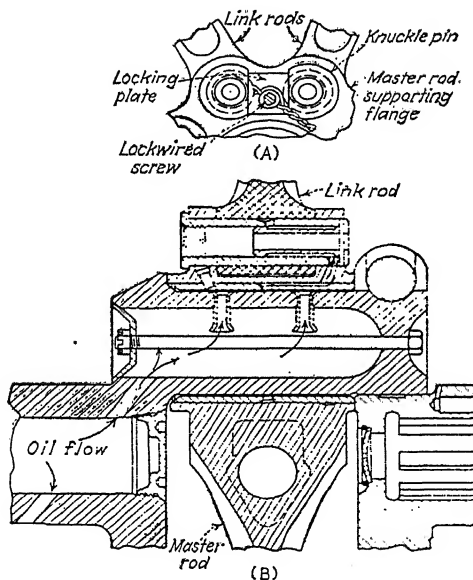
(A) Method of holding link pins in place, and (B) section through the crankpin and a link pin of a Lycoming Type R-680 nine-cylinder radial engine showing the means provided to lubricate the link-pin bearing.
